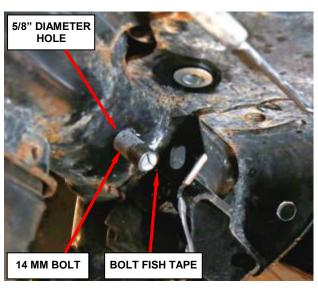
14 MM Bolt in 5/8" Diameter Hole Location
